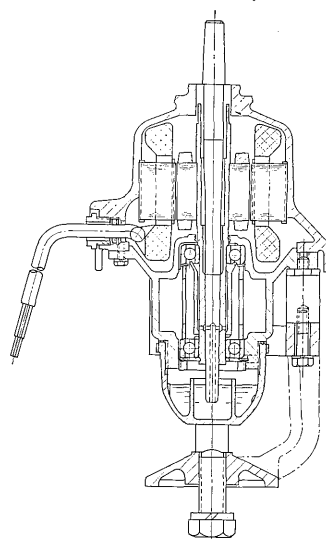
Sectional drawing of pot motor, RS 1112-2
